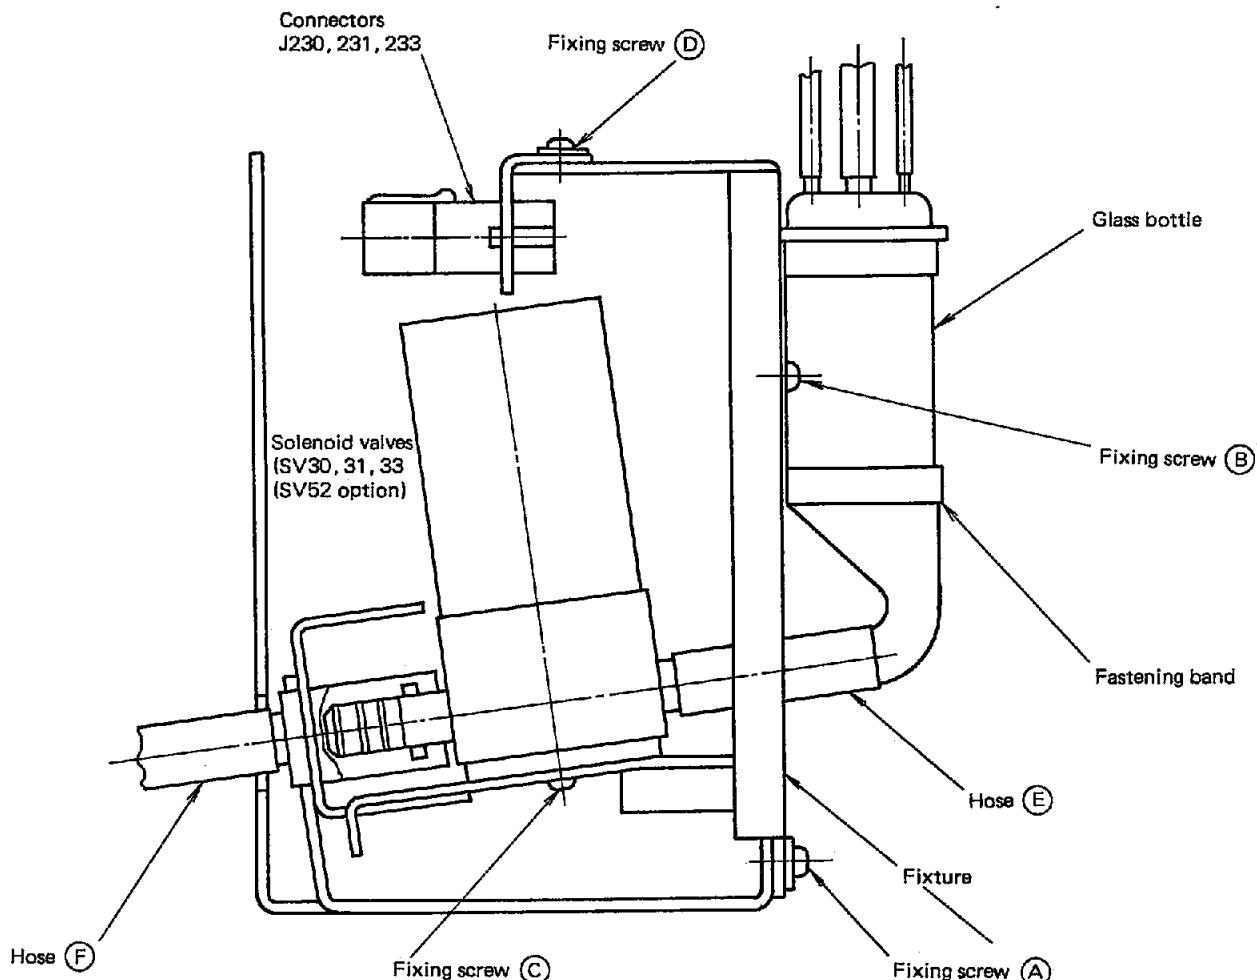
Vacuum Bottle and Solenoid Valves for Drain System
